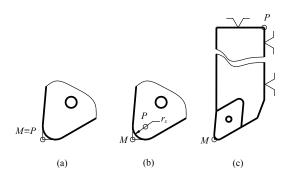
Position of the dimension-defining (M) and programmed (P) points; (a) M and P coincide; (b) P is in the centre of the tool nose; (c) P is at the tool datum
